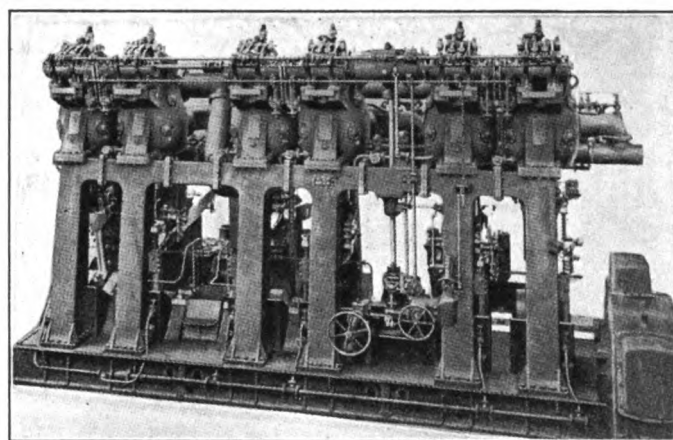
A BELGIAN TWO-CYCLE CROSSHEAD-TYPE ENGINE EQUIPPED WITH VALVE-IN-HEAD CYLINDERS
